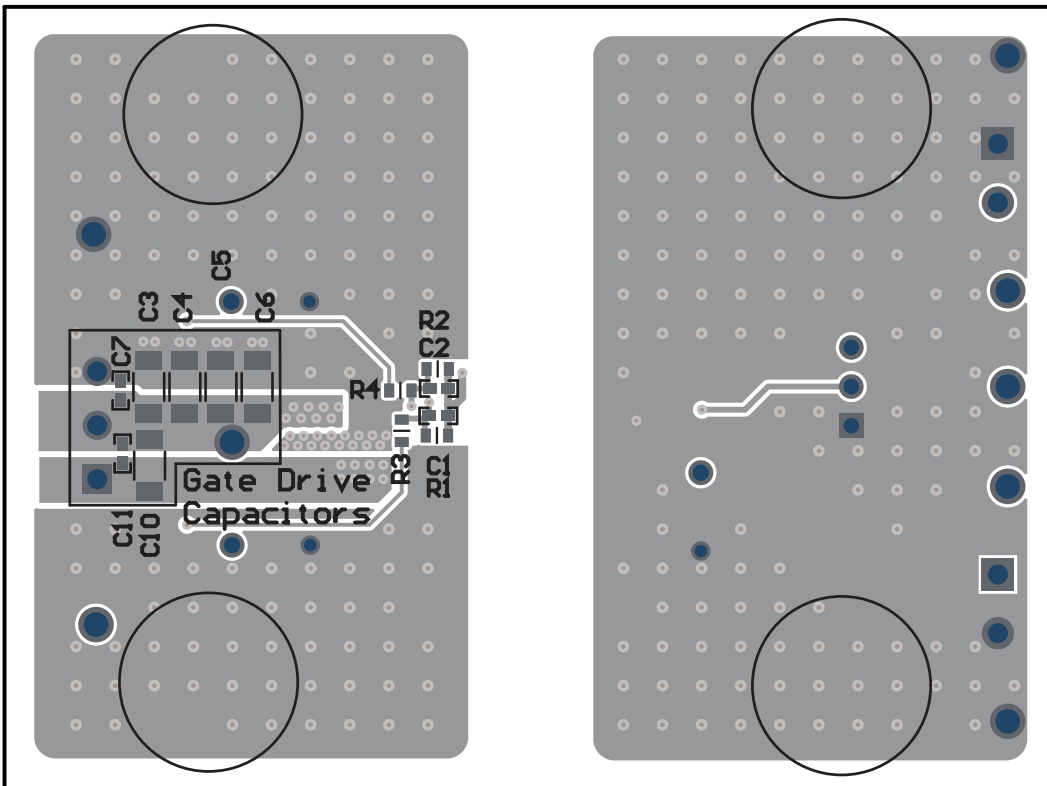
UCC14240EVM-052, PCB Bottom Layer, Assembly (Mirrored View)
